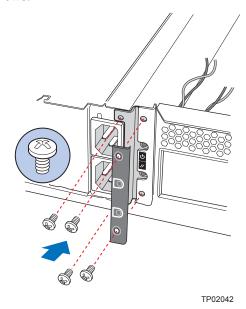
Securing Power and Reset Switch Bracket and Switch Cover to Chassis
